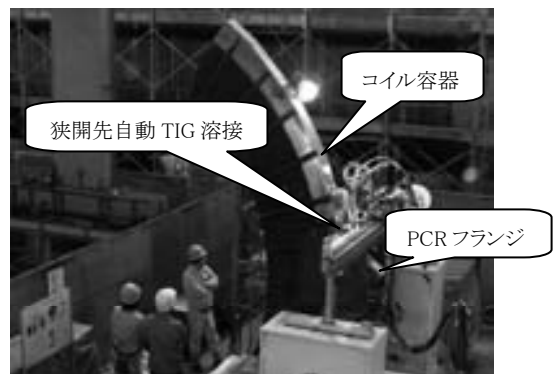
Preliminary Test for Trial Fabrication of A1 Segment
